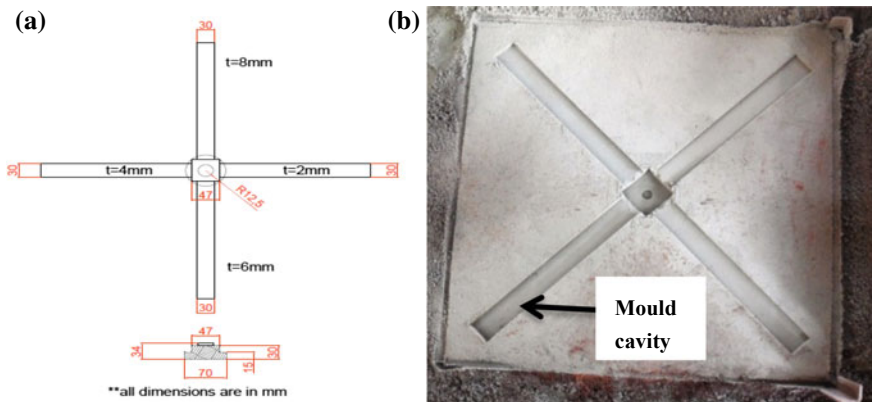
a The pattern chosen for the fluidity investigation. b Sand mould
